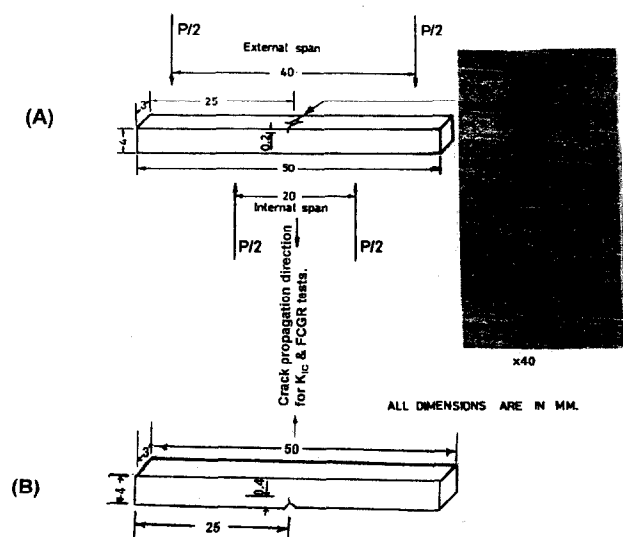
(A) Indented and precracked specimen used in four point bend loading. Cracks are located at the four corners of indentation. (B) Notched and precracked specimen also used in four-point bend loading.
